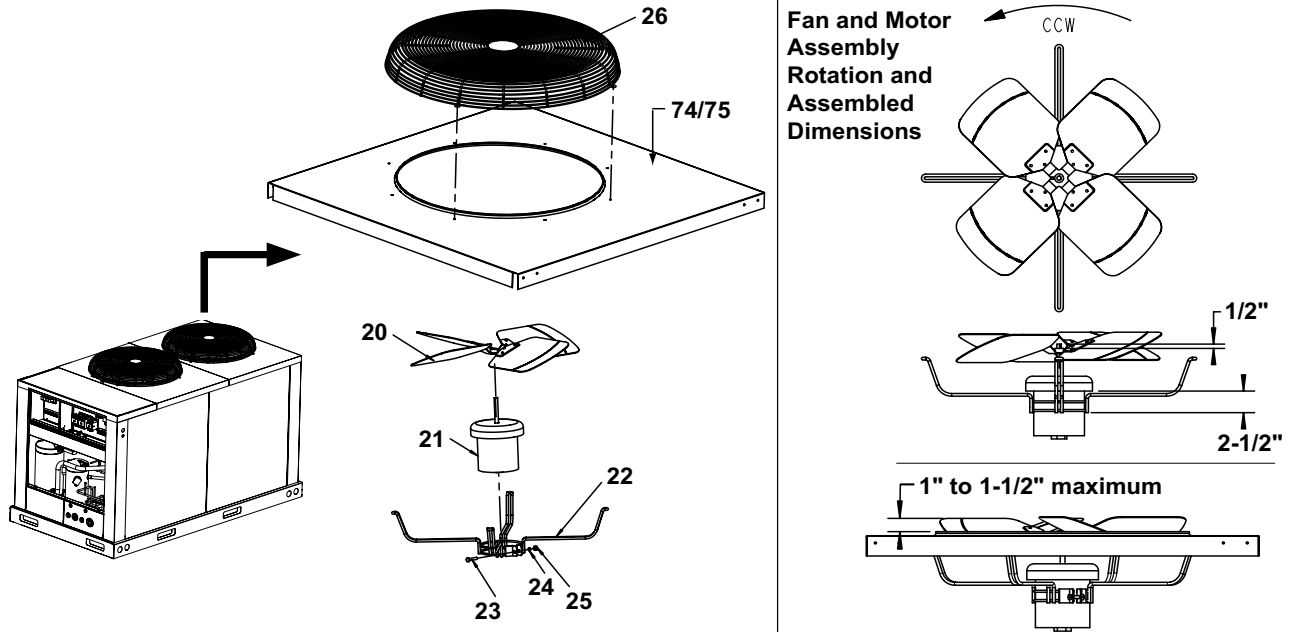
Condenser Fan and Motor Assembly (Refer to Table 6)
